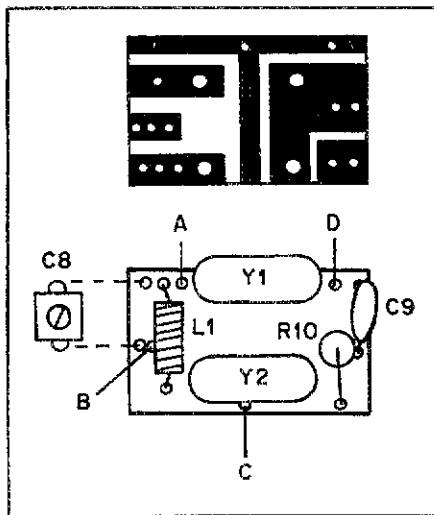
Tail-end filter circuit-board etching pattern and parts-placement diagram. The etching pattern is shown full size with black areas representing copper.
